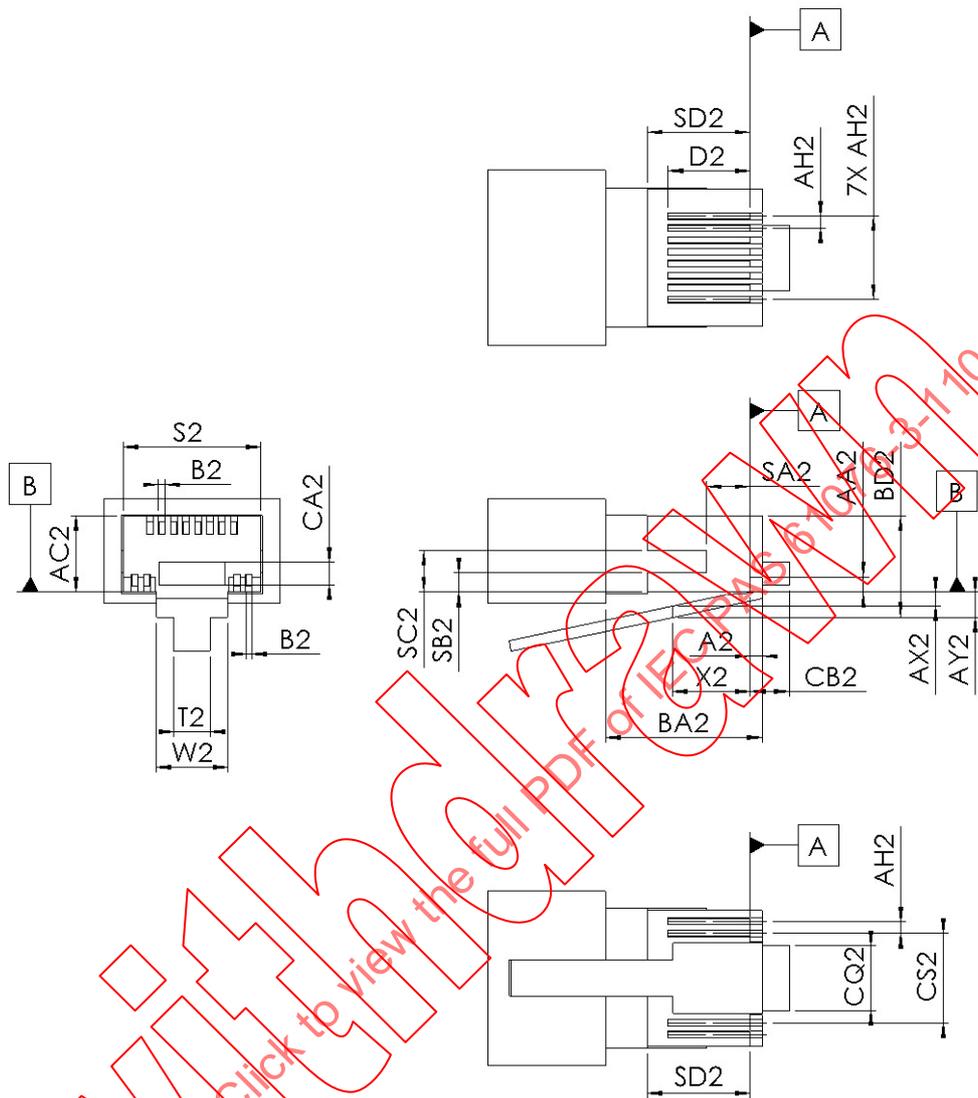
Physical interface, fixed connector contacts, side view, see table 2
